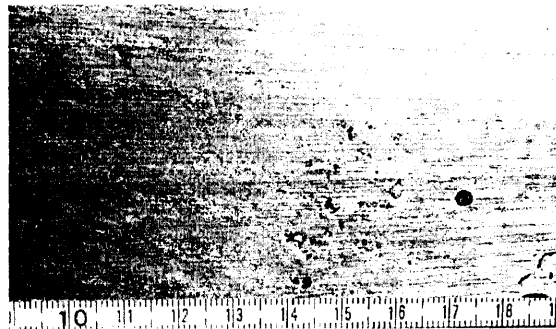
Gas holes and shrinkages on casting, zone near shaft-flange transition radius.
